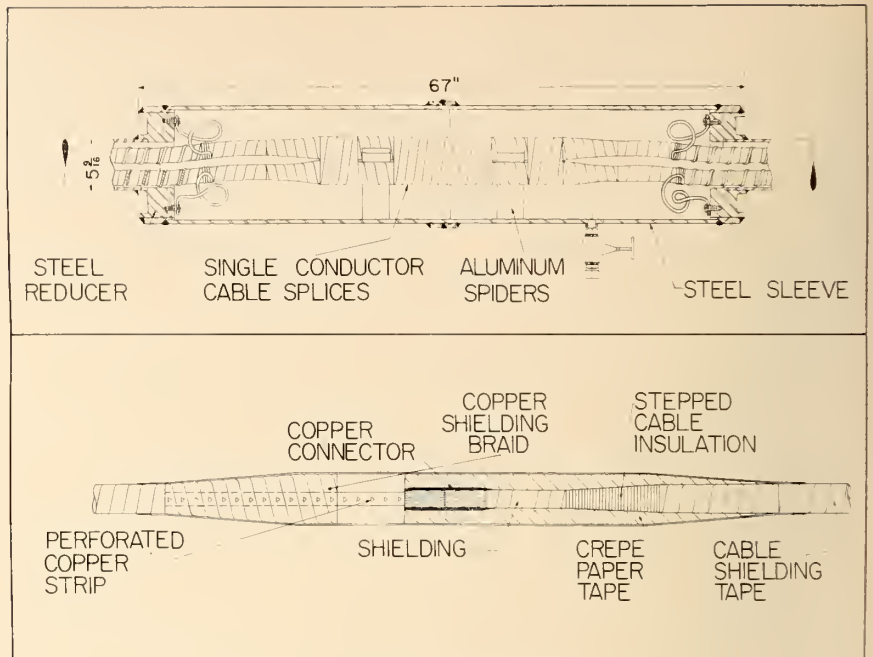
Oil-Filled Pipe Cable Splice and Splice Assembly
